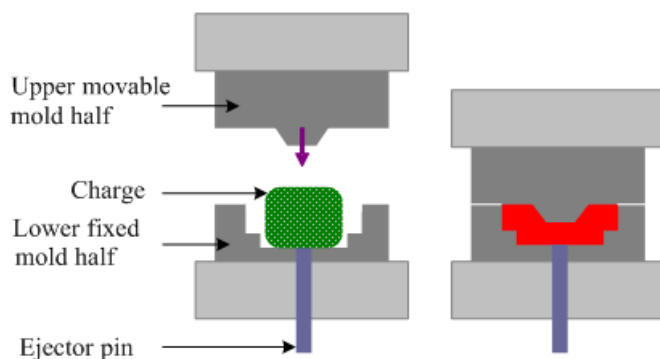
Car Tyres and other rubber products are manufactured using compression moulding
